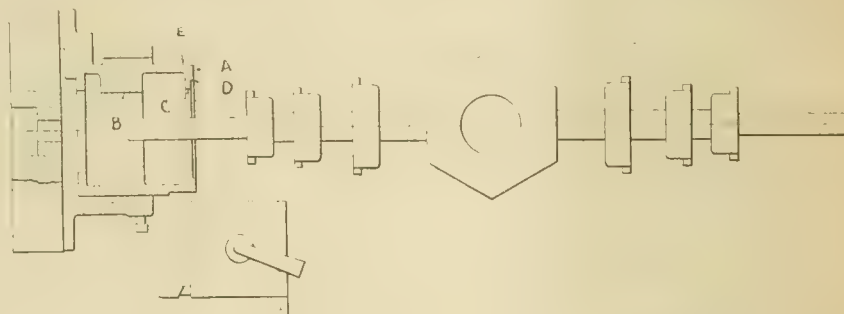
THE TOOLING EQUIPMENT USED IN THE FIRST OPERATION ON THE PIECE SHOWN AT FIG. 11.
